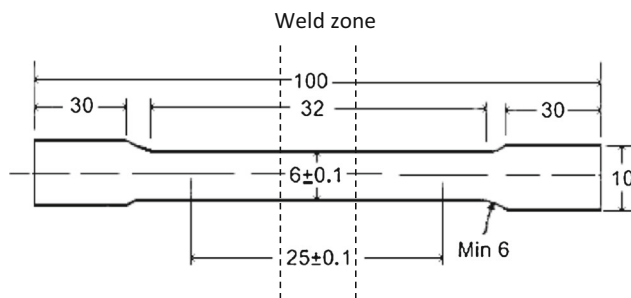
Tensile test sample perpendicular to the weld line in middle (dimensions in mm)
